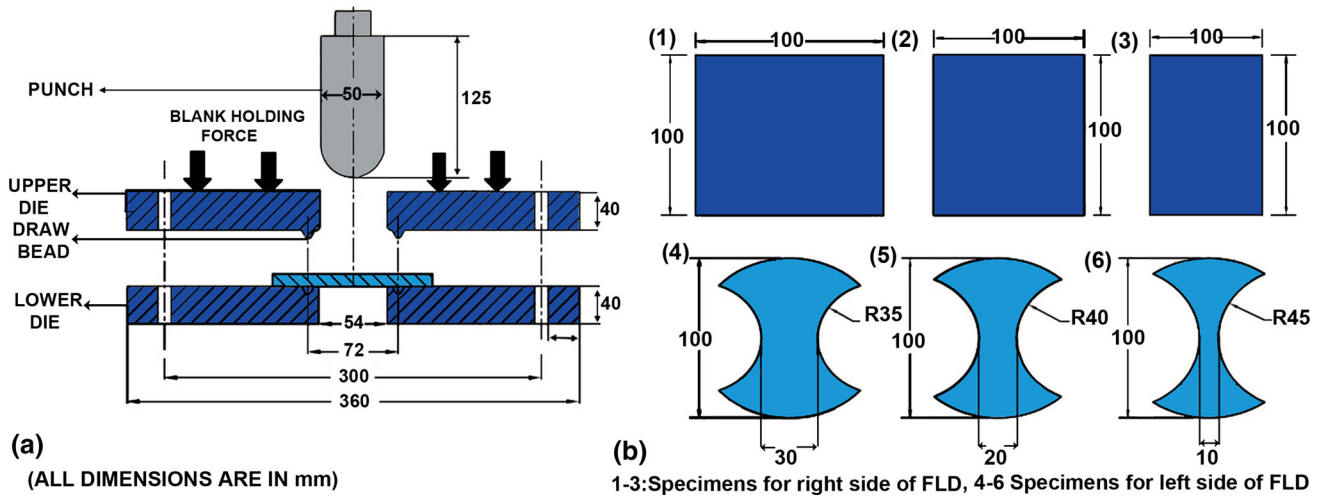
Schematic displaying: (a) LDH test setup with a punch and die assembly and (b) specimen geometry (rectangular and Hasek specimens)
